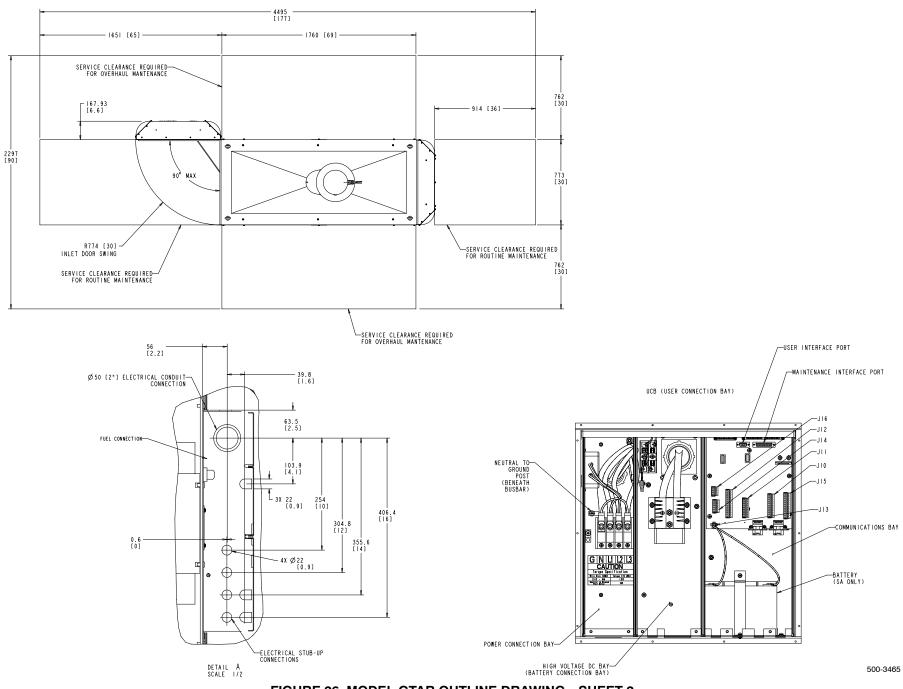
MODEL GTAB OUTLINE DRAWING—SHEET 2
